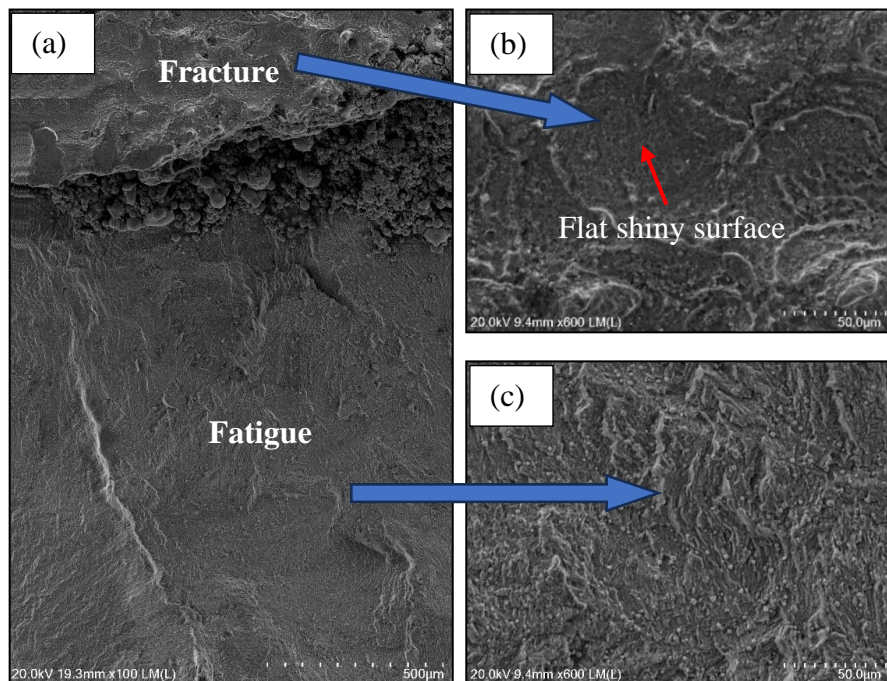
SEM image shows (a) the complete failure surface, (b) the fracture surface and (c) the fatigue surface of specimen FT-9.
